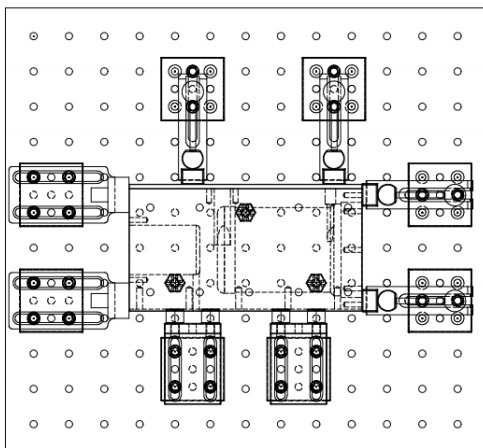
Final assembly of modular fixture design for hydraulic cylinder
